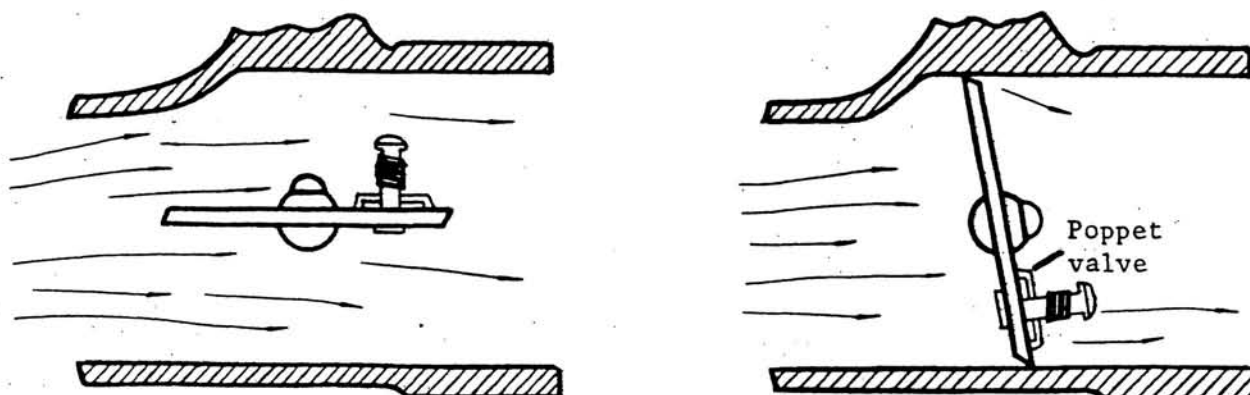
Choke positions. Left - choke opened, Right - choke closed
